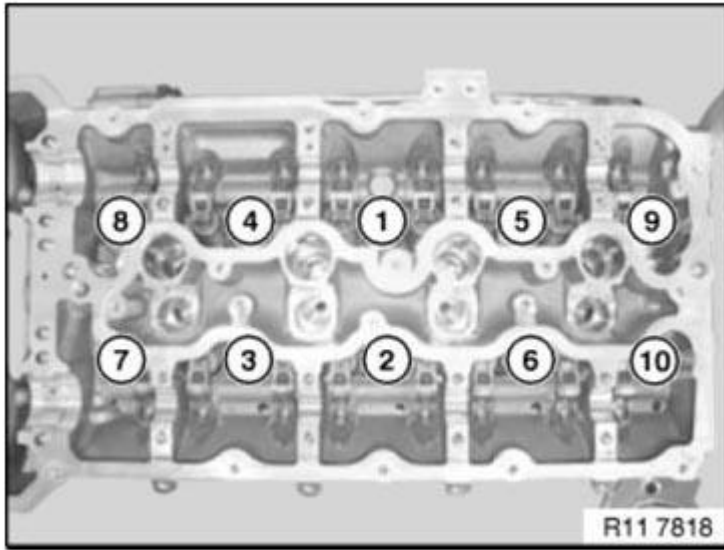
Identifying Cylinder Head Bolts Tightening Sequence
